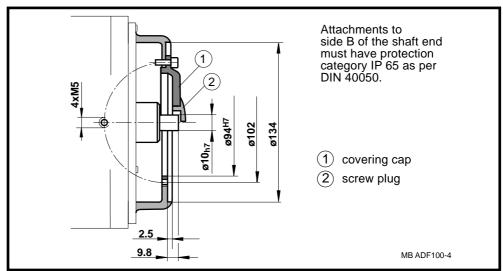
Main spindle motor ADF 100 - side B shaft end or shaft extension
